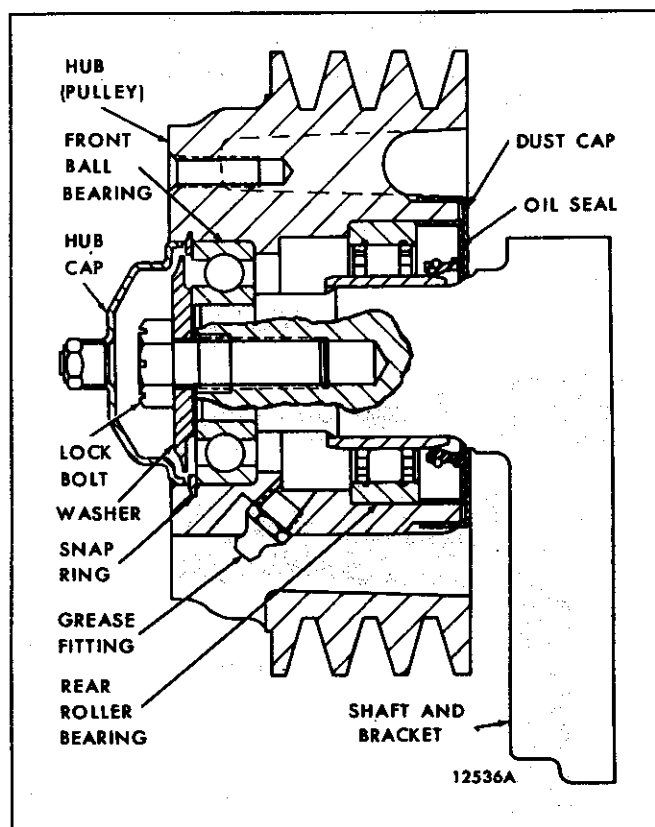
Shaft Type Fan Hub Assembly (4-53 and 6V-53 Engines)
